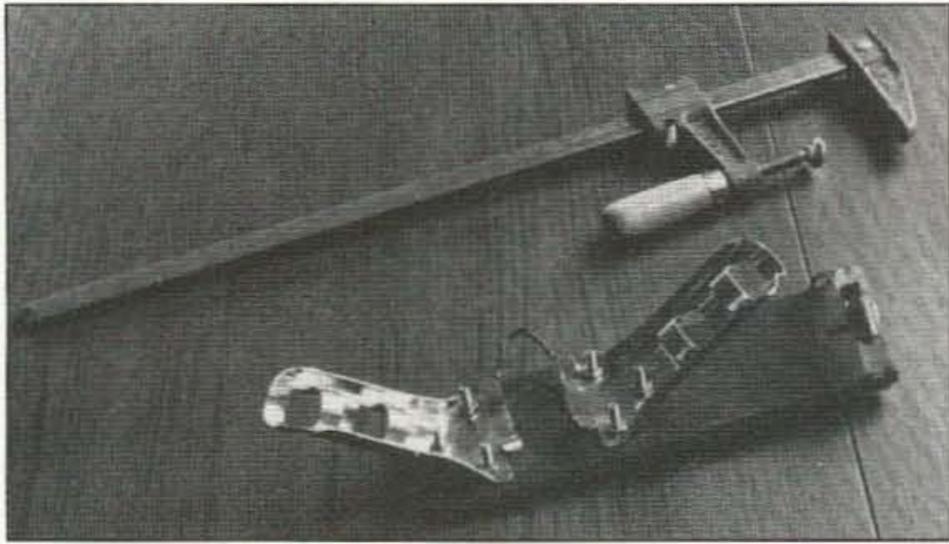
Photo F. The mounting hardware consists of 3/4" flagpole brackets on a board, and an 18" C-clamp that attaches to the board with a large hose clamp.
